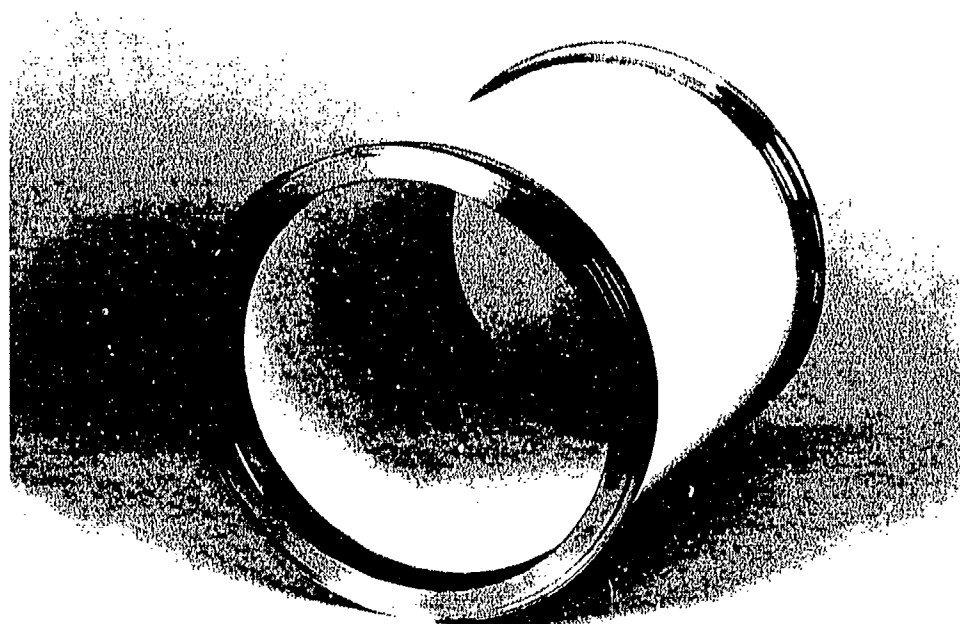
12-inch alumina cylinder with Mod1, type 2 end-cap joint rings.
